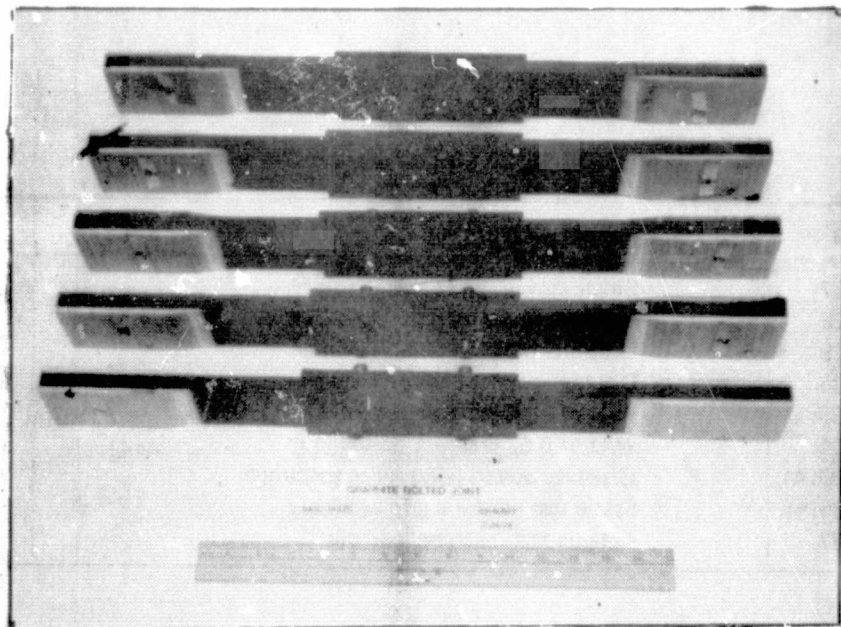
Single-Row Graphite Bolted Joint, Drawing 69-60927
